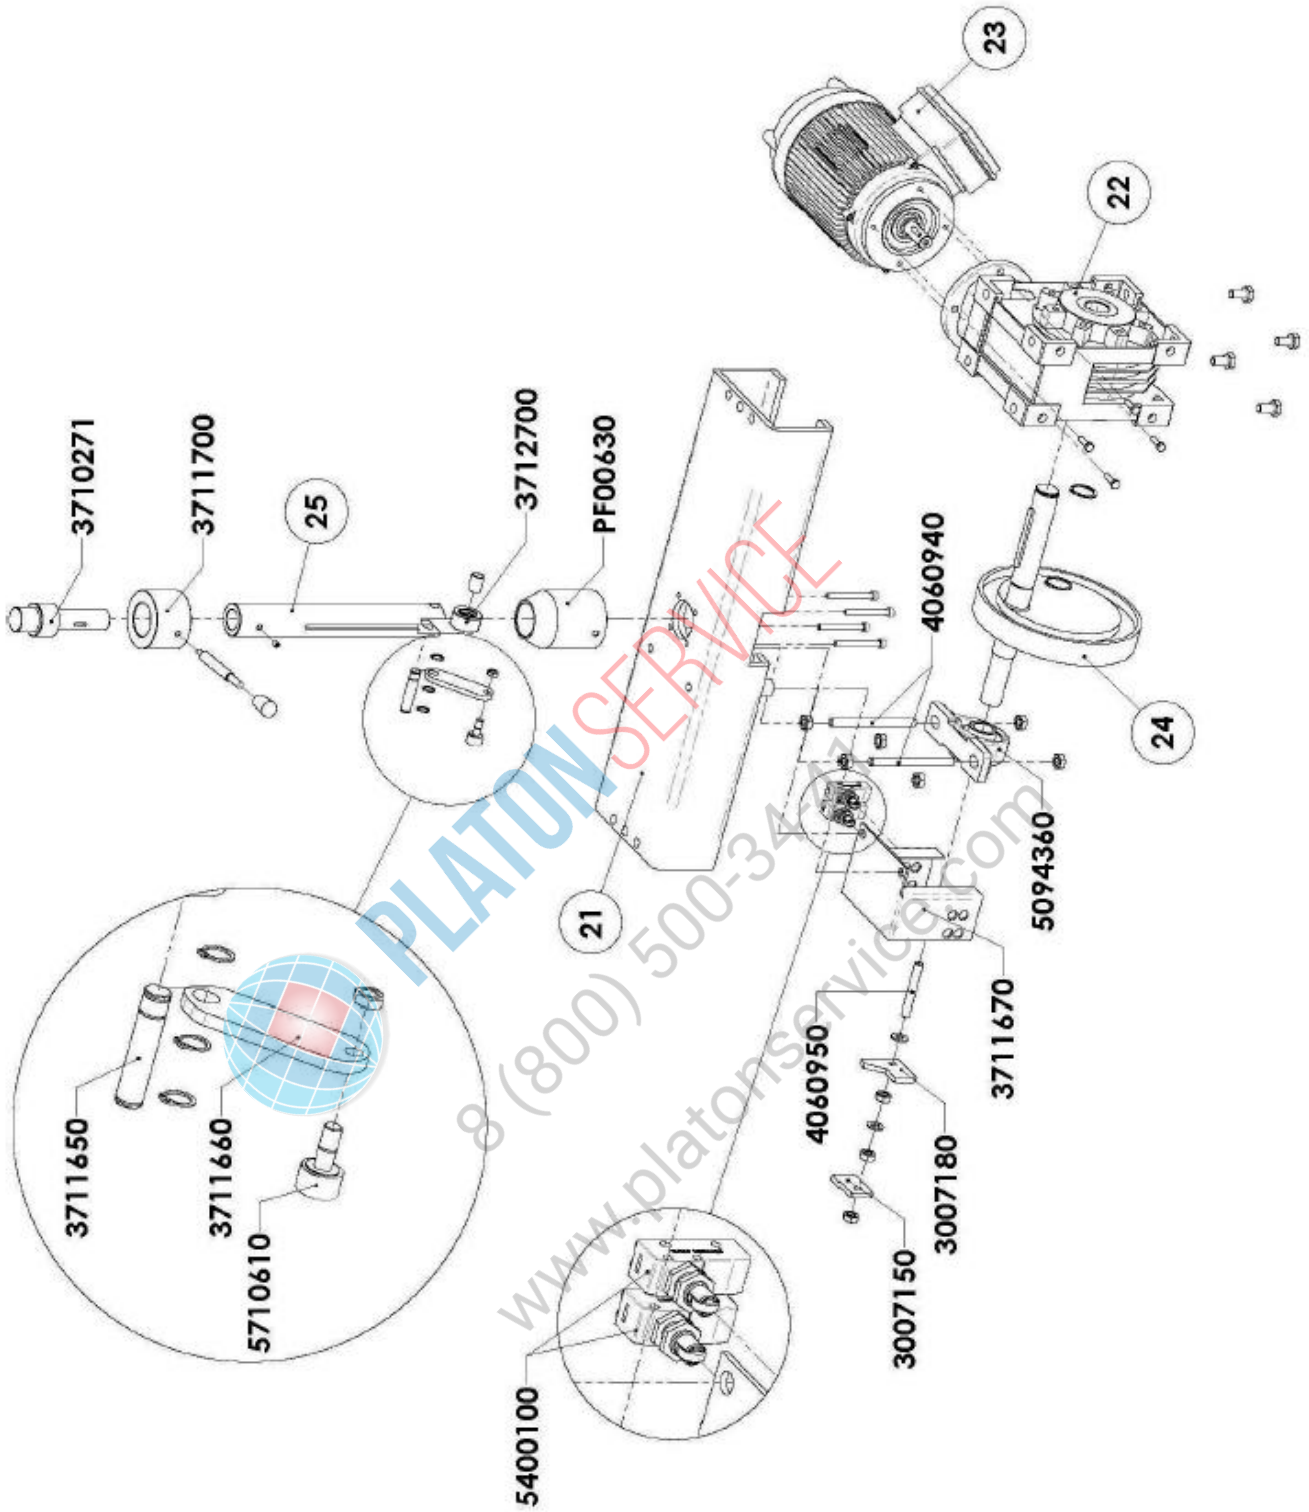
DEVIL 33 / DEVIL 45 - exploded view
